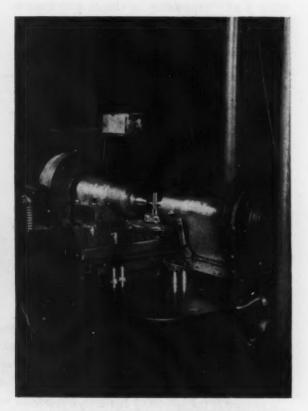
A special two-spindle milling machine cuts hex flats for a wrench hold on threaded nipples. These nipples are carried on a vertical arbor that indexes automatically 120° before each working pass of the table.
